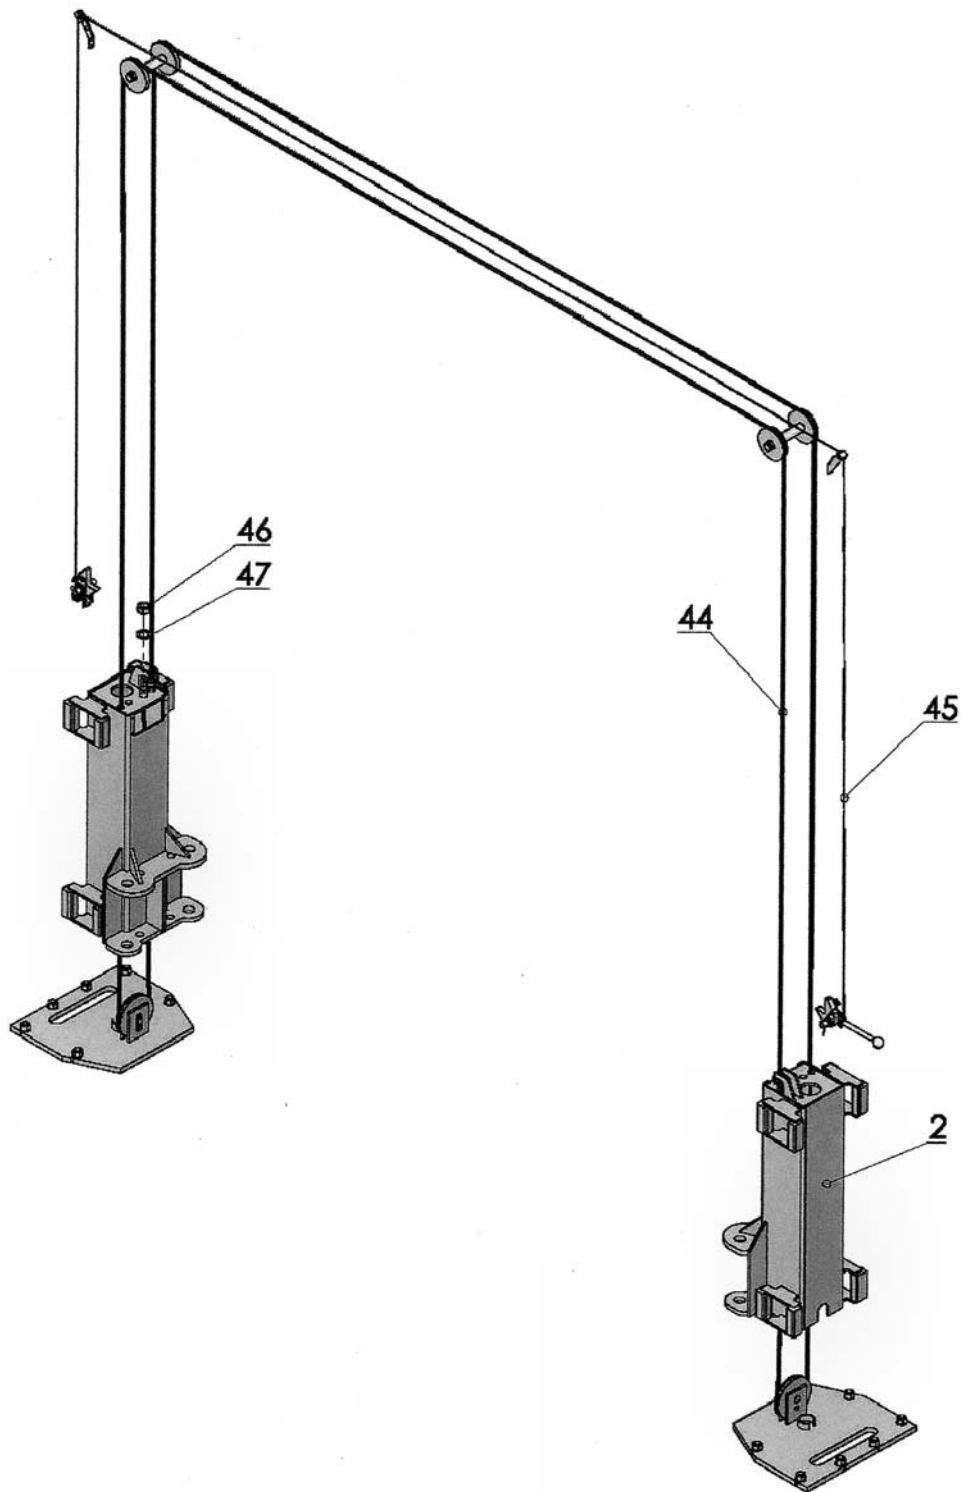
Illustrated Parts Breakdown – Sheet 4 of 6
